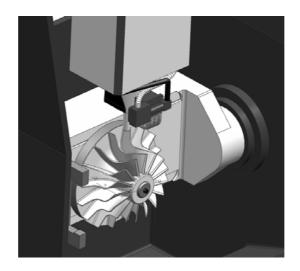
Simulation of machine tool used to validate an impeller manufacturing process (Silva, 2006).
